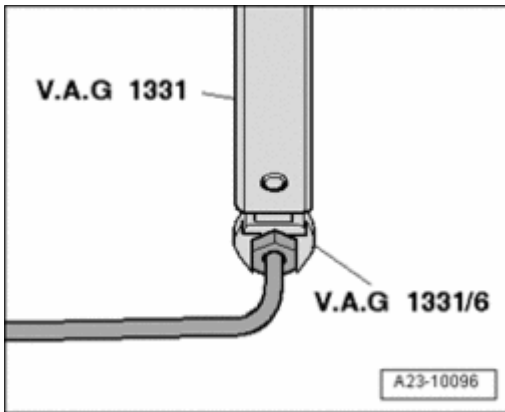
Tightening SW 17 Union Nut At Fuel Rail Using Torque Wrench V.A.G 1331 With SW 17 Socket V.A.G 1331/6
